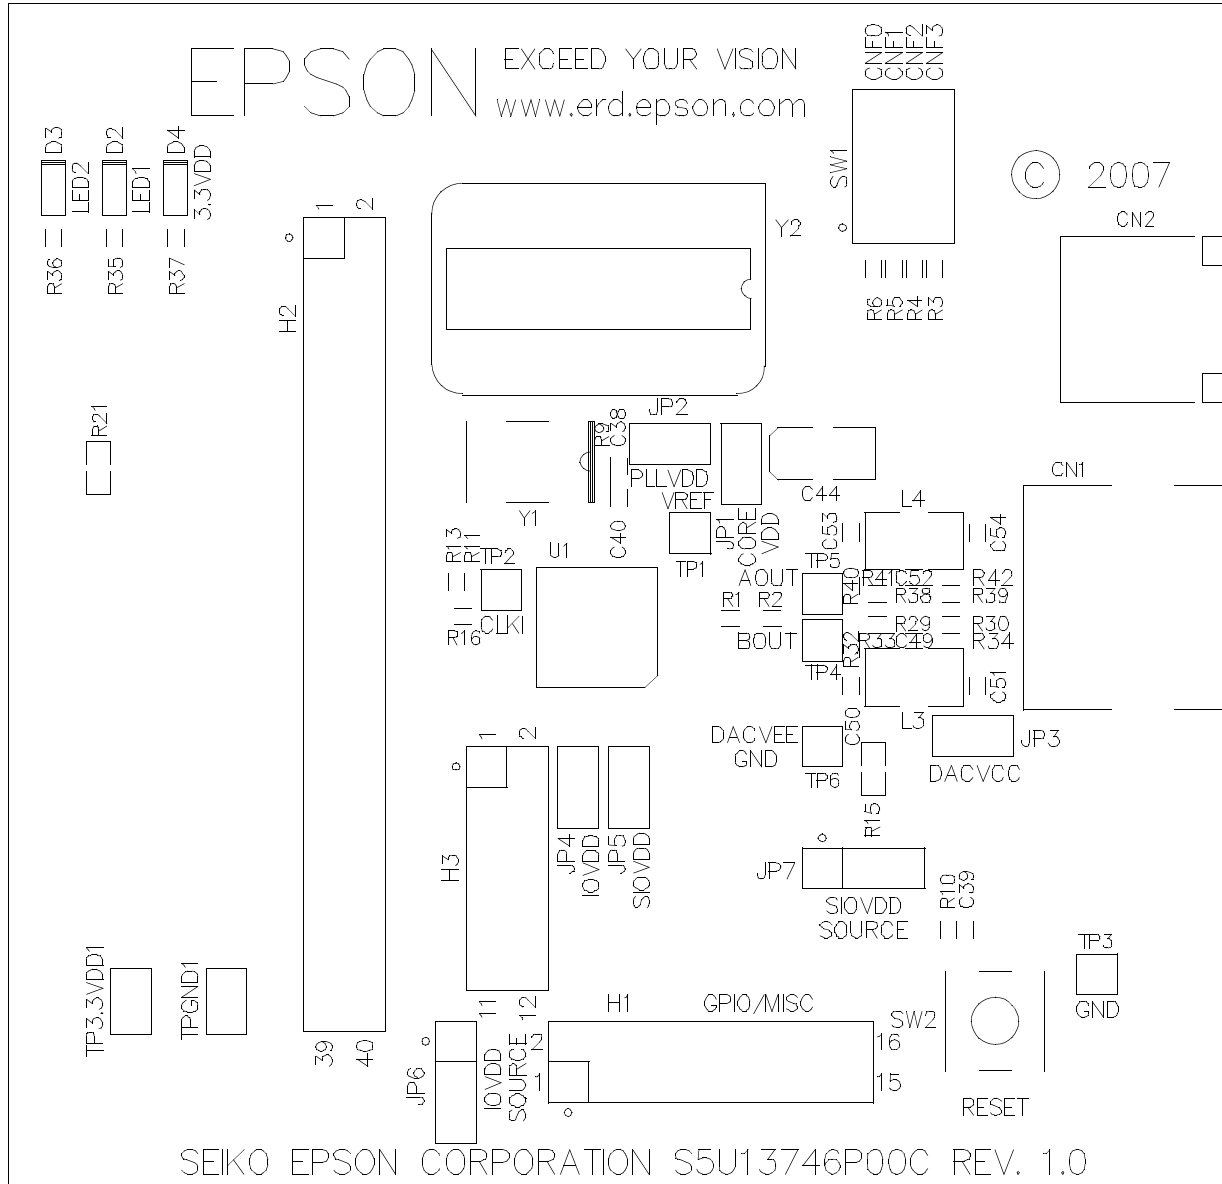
S5U13746P00C100 Board Layout - Top View
